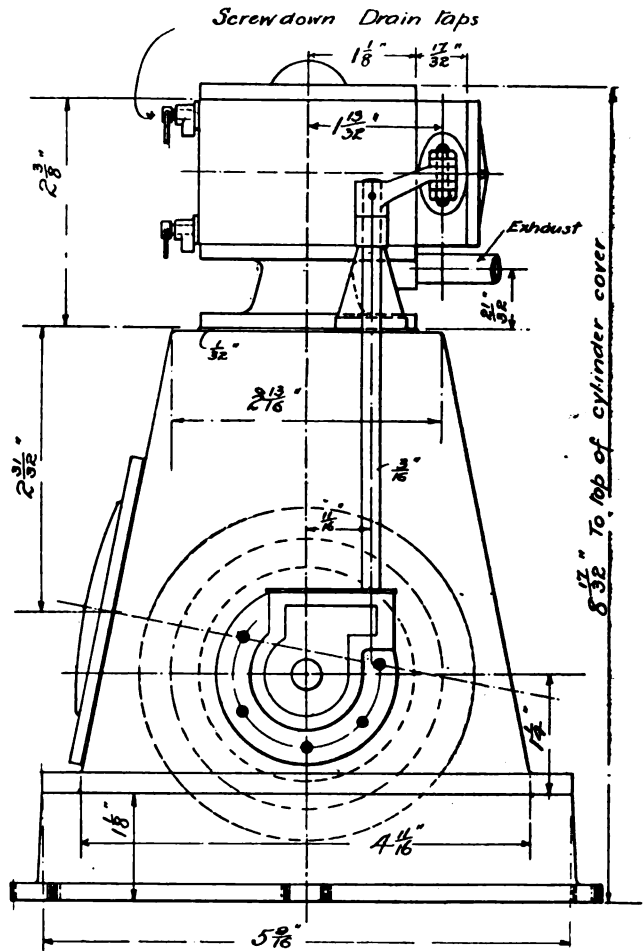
END VIEW SHOWING VALVE GEAR.
